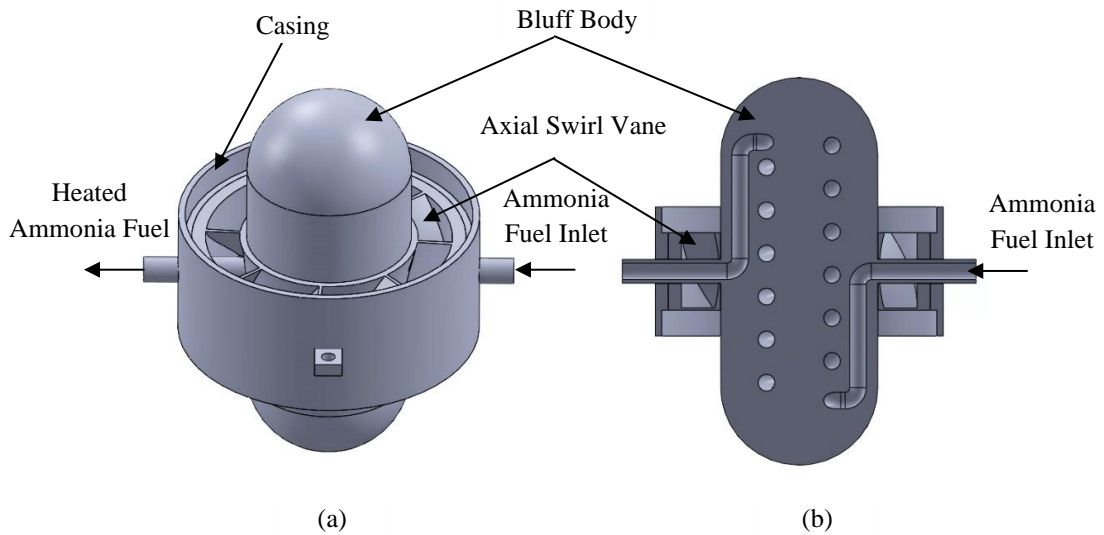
2: (a) Cracking system, (b) Section view showing tubular passage through which the Ammonia flowed while being heated
